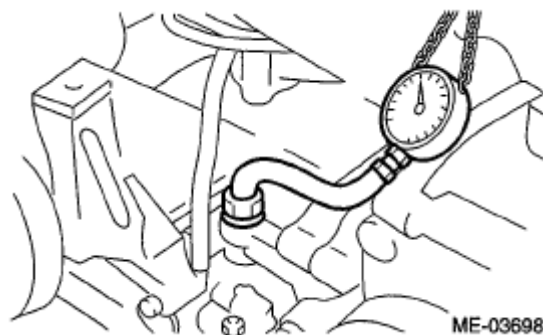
Installing Oil Pressure Gauge To Cylinder Block
